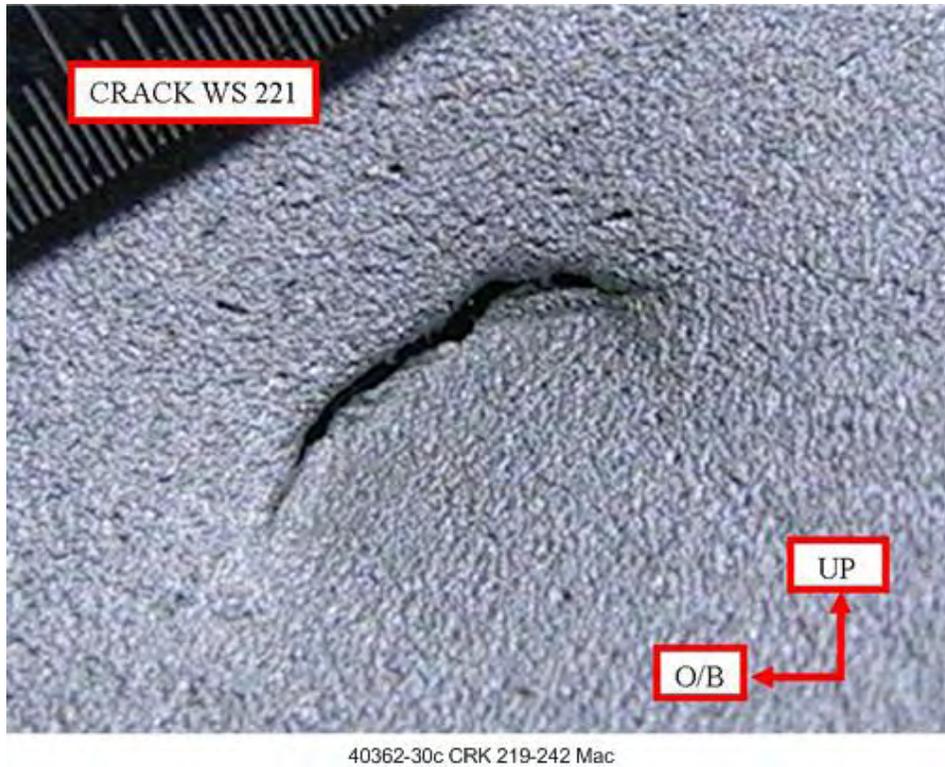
Macroscopic View of Crack on the Left Wing Rear Spar WS 221
